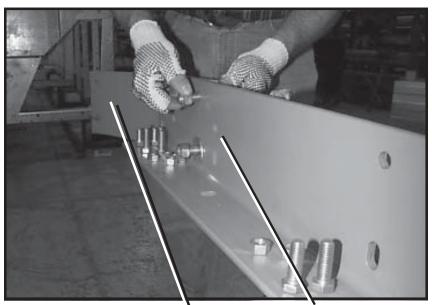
Bolting hitch bracket RH to side rail angle RH.
